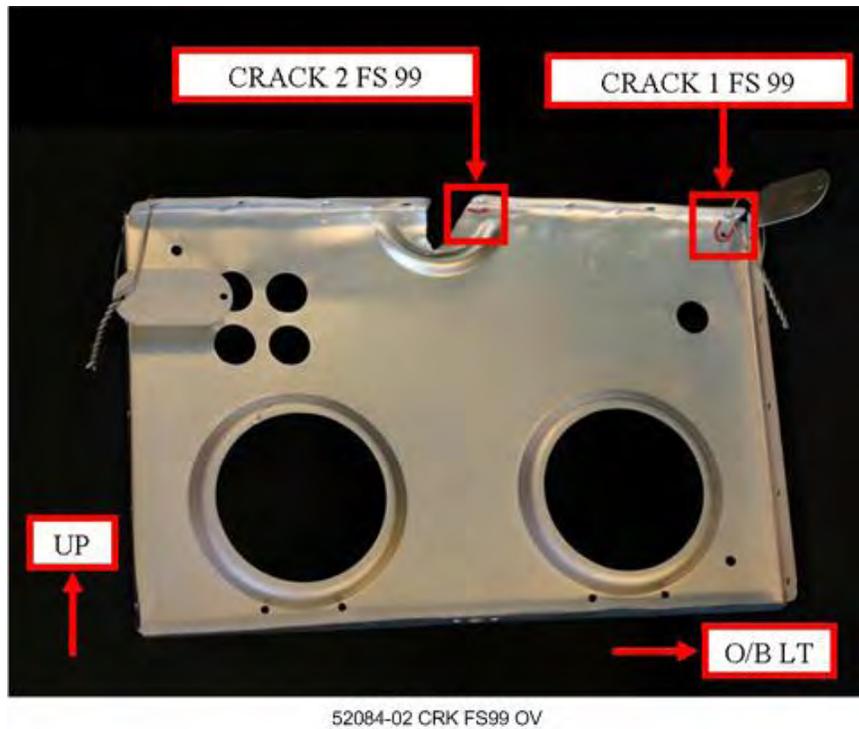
Location of Cracks 1 and 2 on the Bulkhead Assembly FS 99
